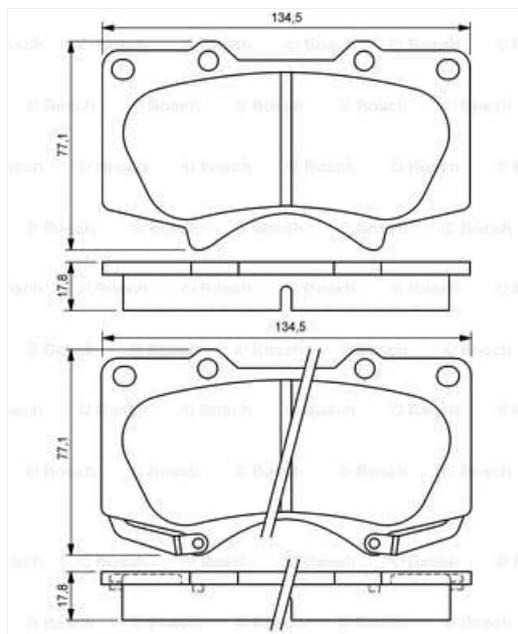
Technical drawing illustrating the dimensions of the Bosch BP1064 brake pads.
